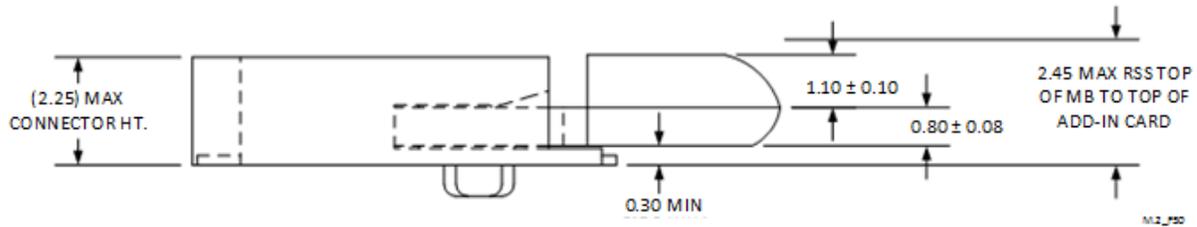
H2.3-S1 – Stack-up Top Mount Single-sided Add-in Card for 1.2 Maximum Component Height
